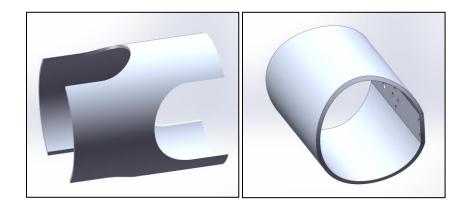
(left), 5b (right): Chassis and thruster housing machined with aluminum stock.
